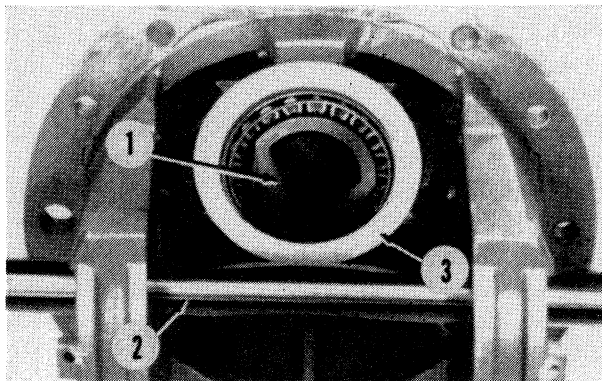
To adjust pinion shaft cone point, install JDG-298 special cone point measuring tool (1) and JDG-293 discs and JDG-74-1 shaft (2) as shown. Measure gap between tools using a feeler gage or shims (3) and refer to text.
